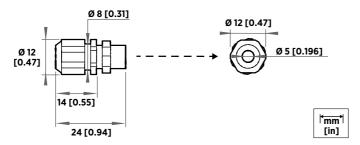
HPP271MOUNTINGSET2/HPP272MOUNTINGSET2 dimensions
